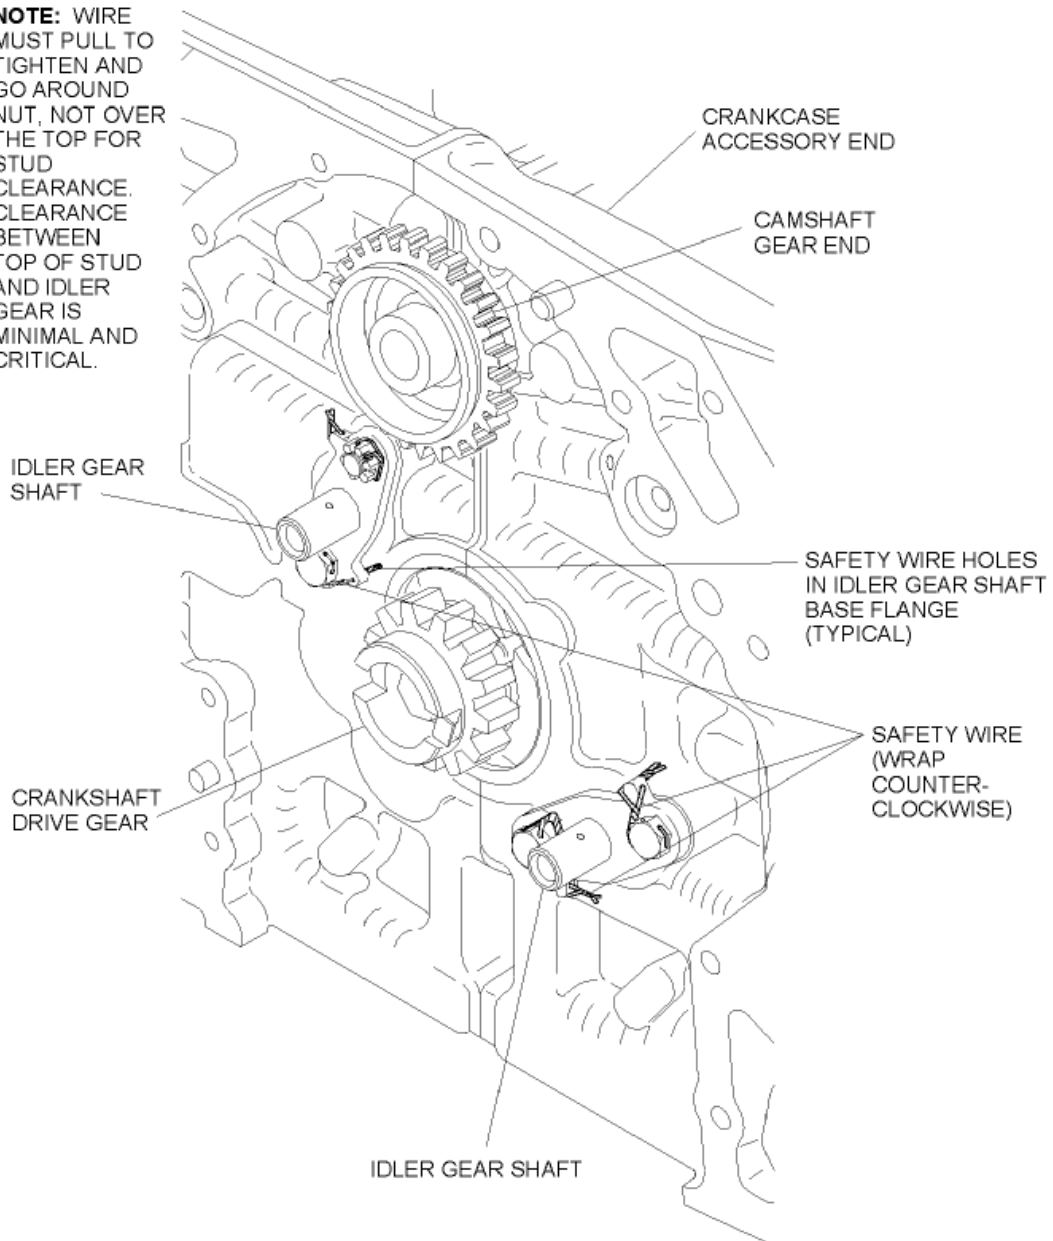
• Idler Gear and Tachometer Shaft Assemblies (cont'd.)
